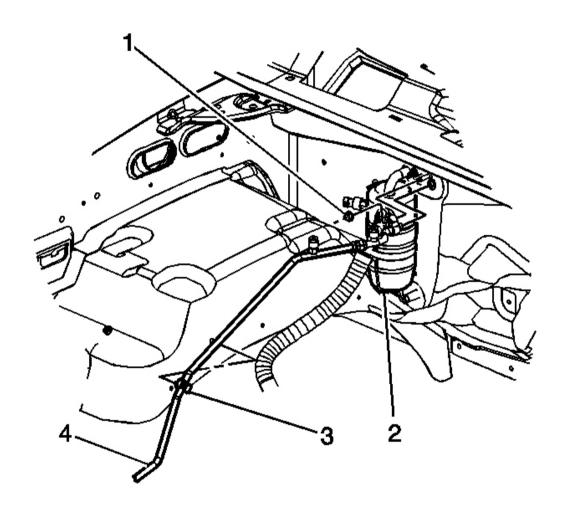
Evaporator Tube Nut & Evaporator Courtesy of GENERAL MOTORS CORP.
